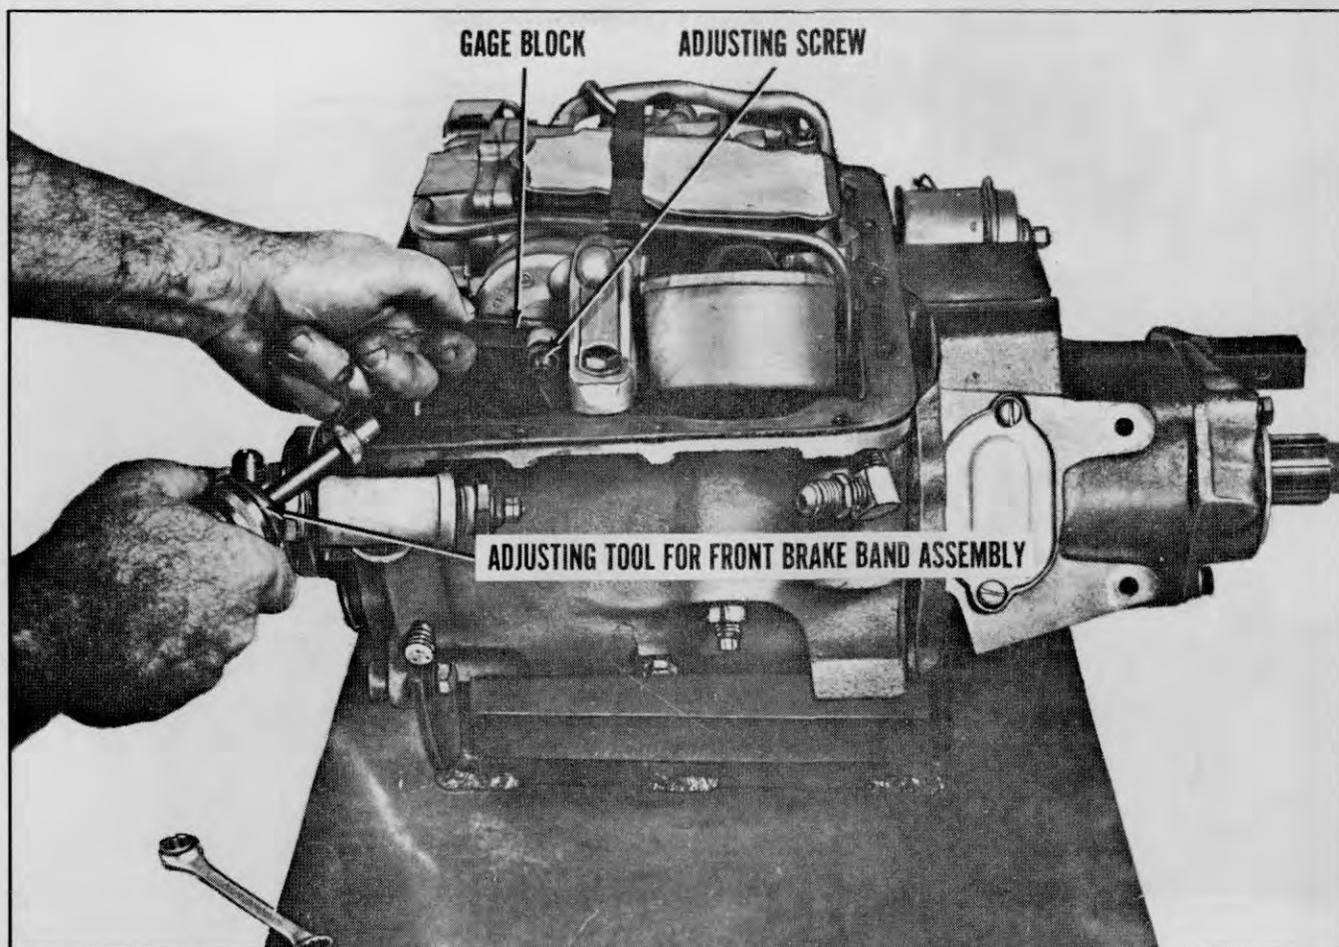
Pull Back On Adjusting Rod and Insert Gauge Block
